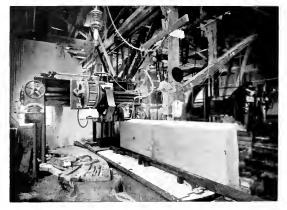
440-volt, 3-phase, 60-cycle Induction Motor geared to a Carborundum Attachment on a Single Circular Planer
